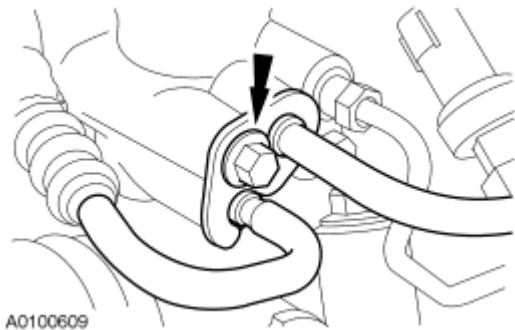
Locating Power Steering Fluid Tubes & Bolt
